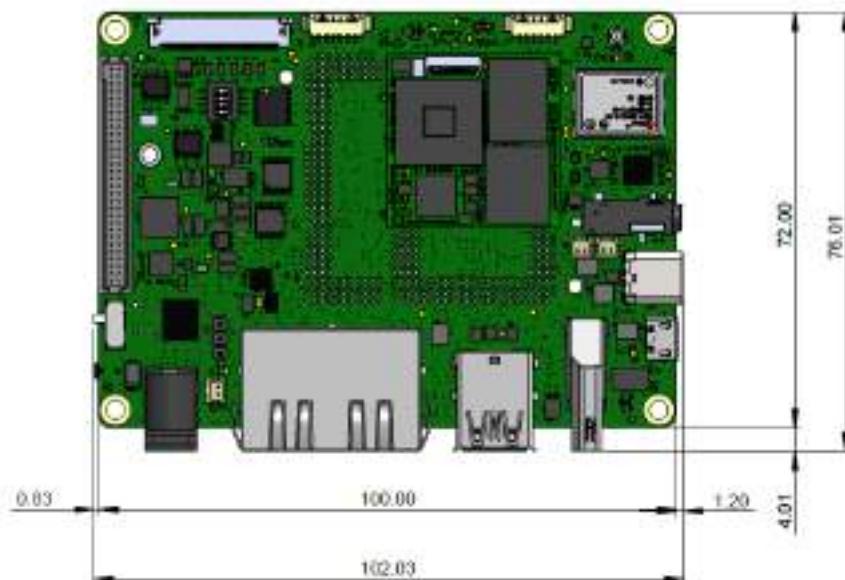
Mechanical Dimensions of i.MX 8XLite Pico ITX SBC Top View
